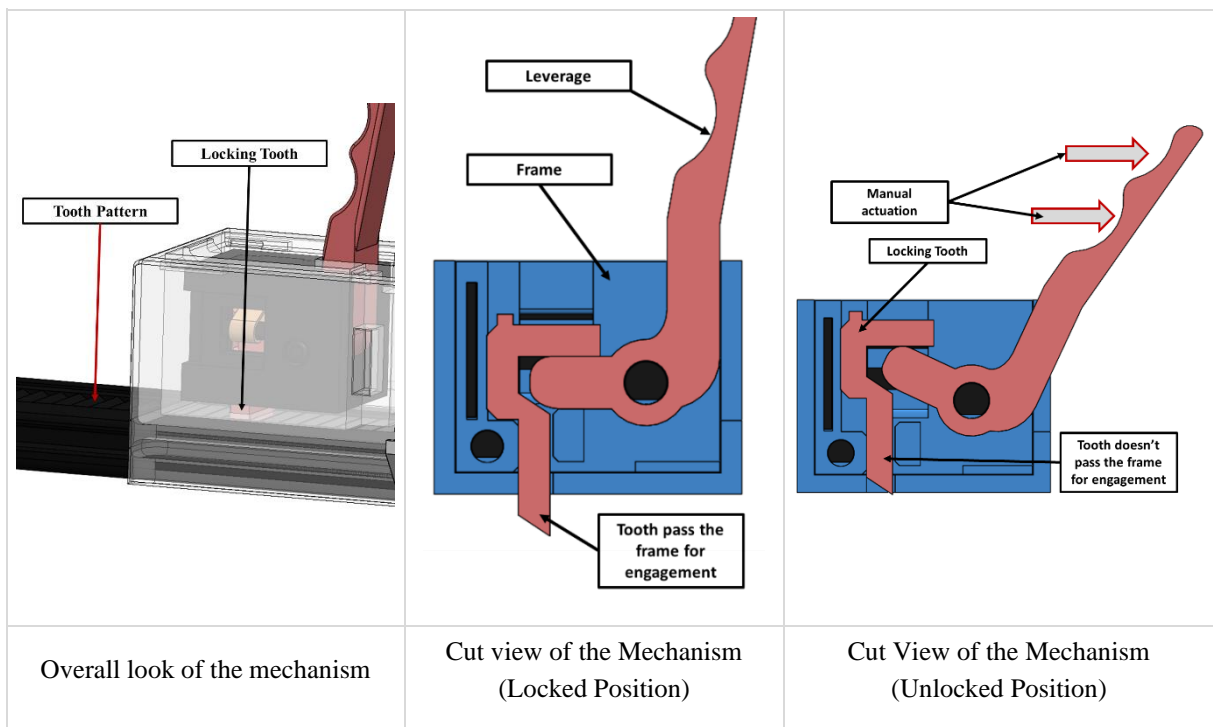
Detailed View of the Shoulder Support's Locking Mechanism
